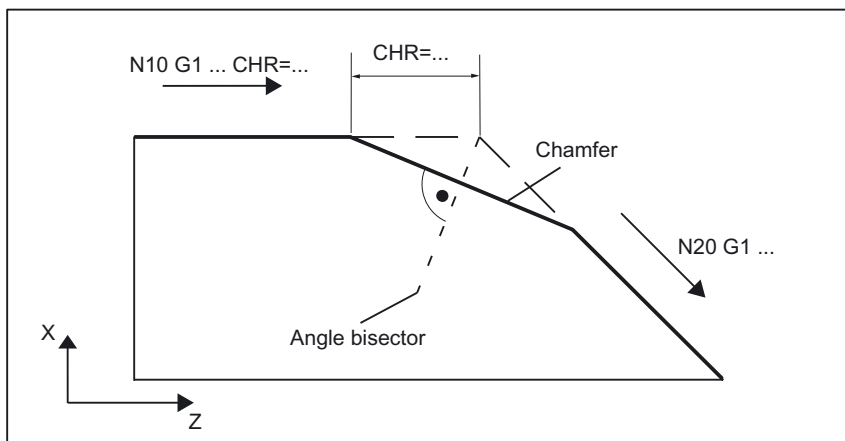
Inserting a chamfer with CHR using the example "Between two straight lines"
